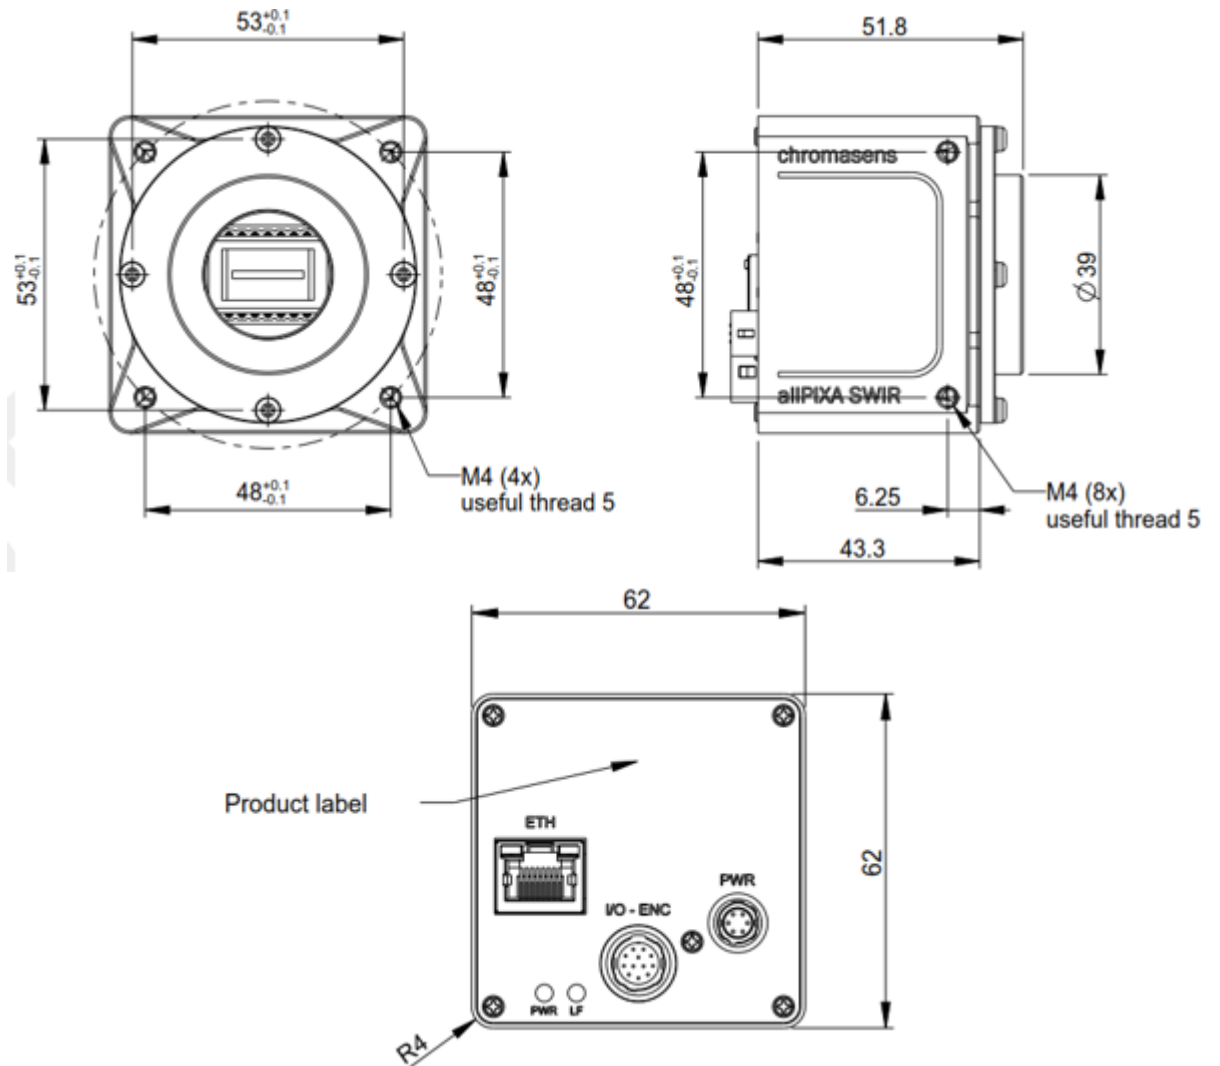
Mechanical dimensions of the allPIXA SWIR camera
